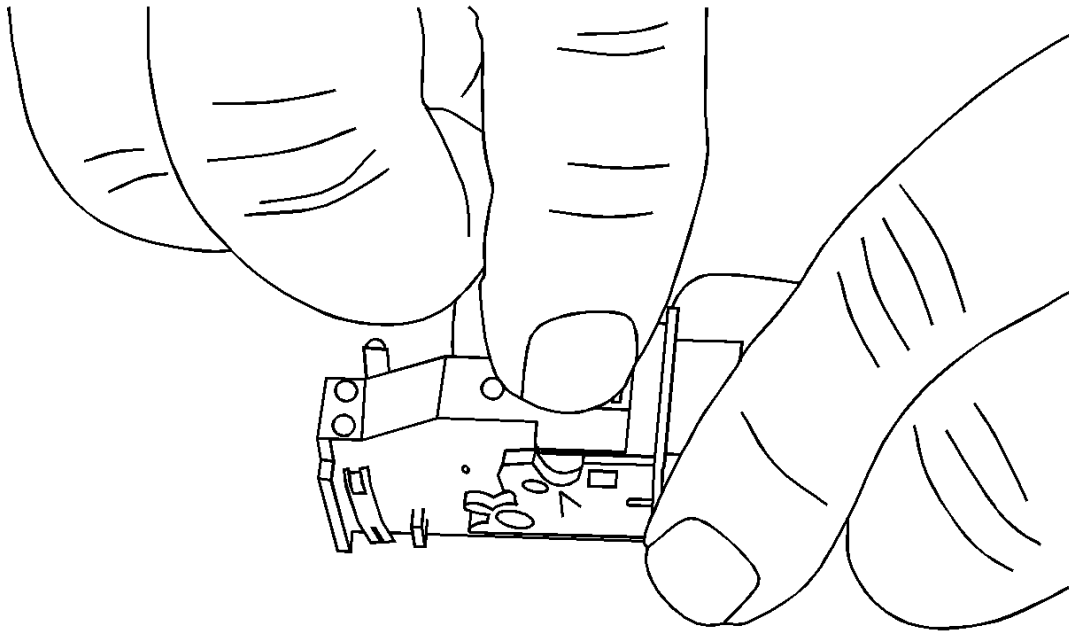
View Of Depressing Lock & Pulling Assist Lever
